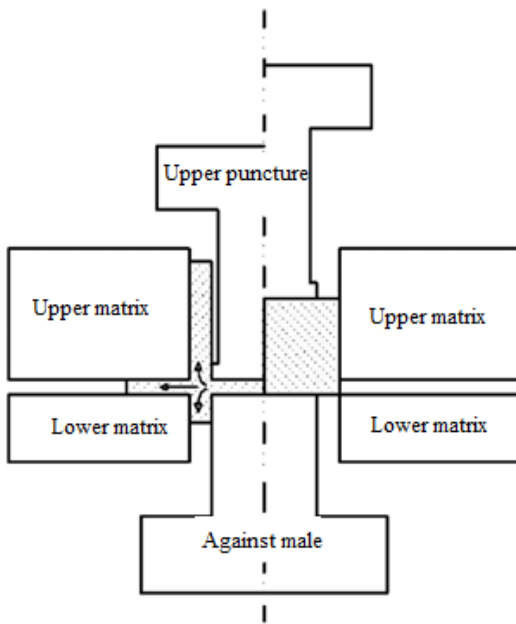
Schematic drawing of the geometry of a forward, reverse and radial extrusion tool [2].
